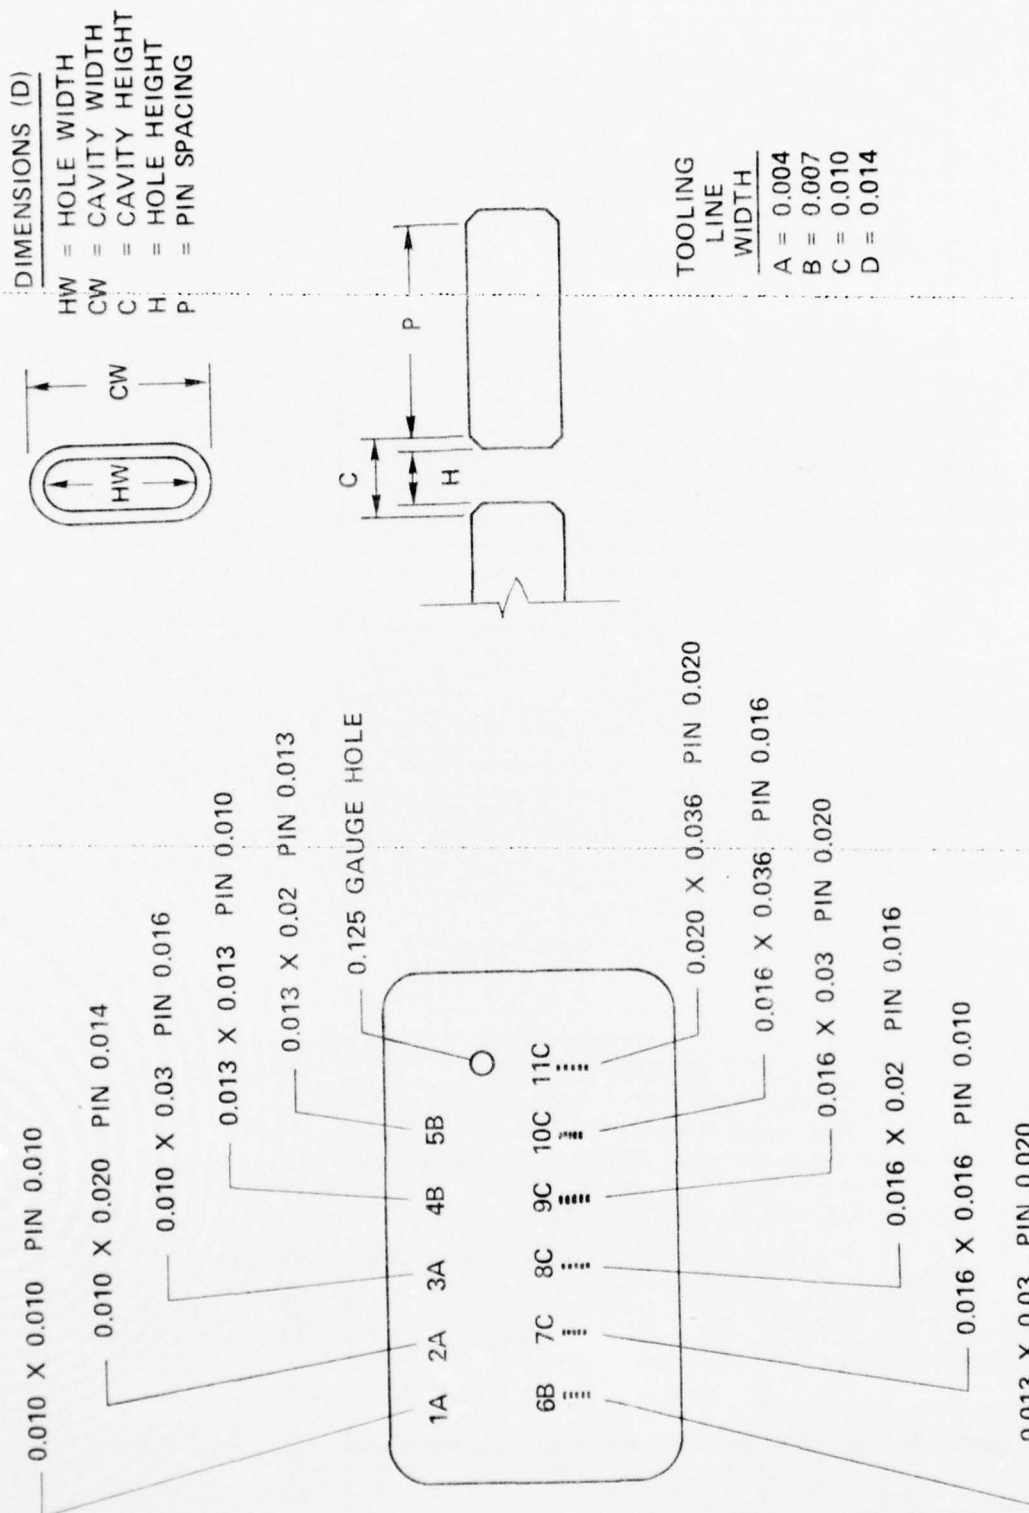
Layout of Cooling Passage Inspection Test Laminate Sheets.
